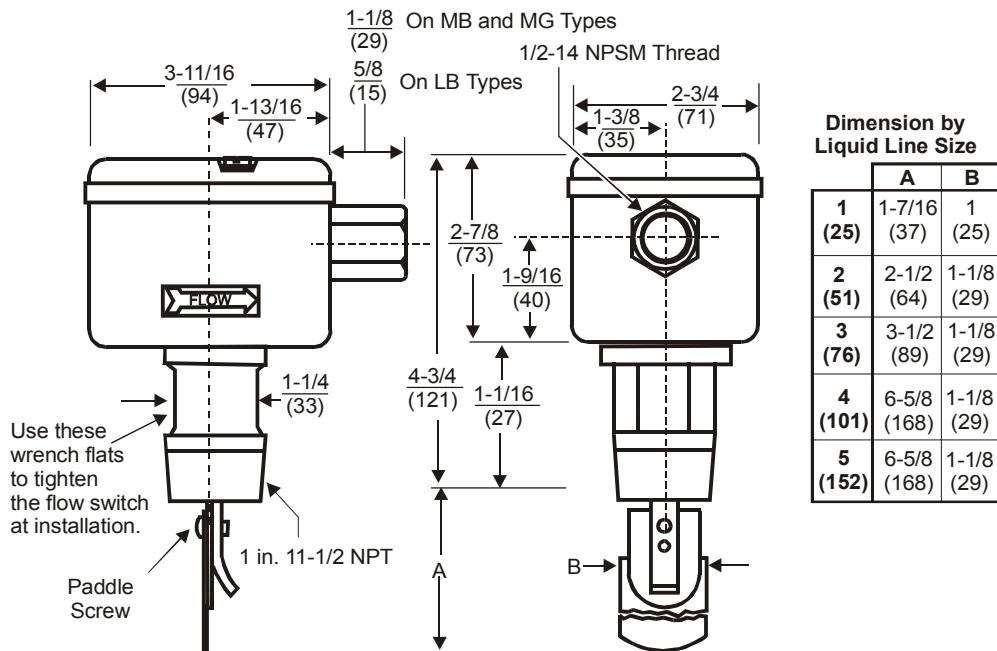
NEMA 3 or NEMA 3R Enclosure (F61LB, F61MB, F61MG Types) Dimensions, in./mm
